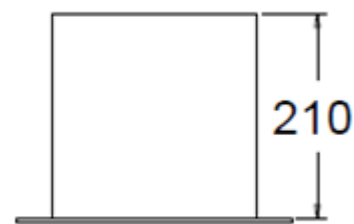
FRONT VIEW OF IMPACT ATTENUATOR.
